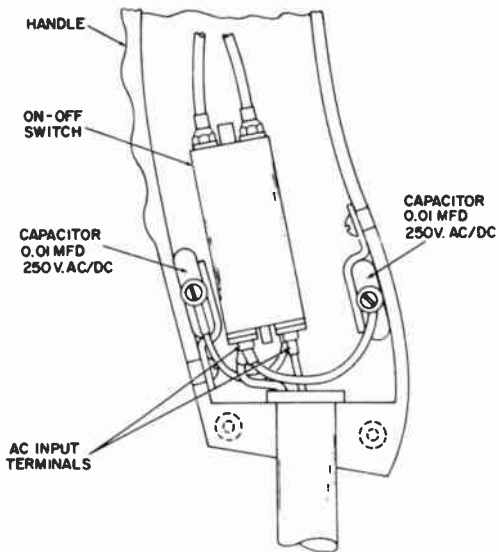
Bypass capacitors installed in the handle of a portable impact tool.
